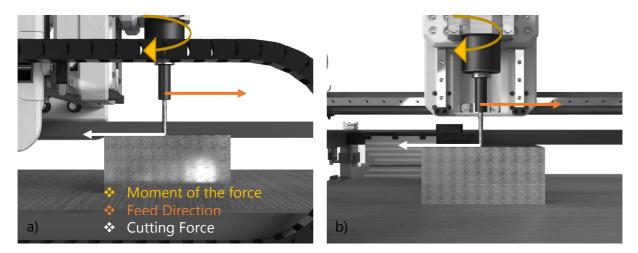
Cutting forces, a) X cut; b) Y cut.
